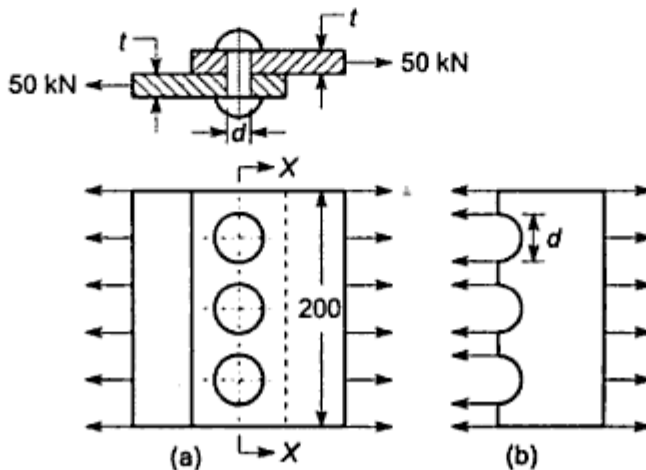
(a) Riveted Joint (b) Tensile Stress in Plate
